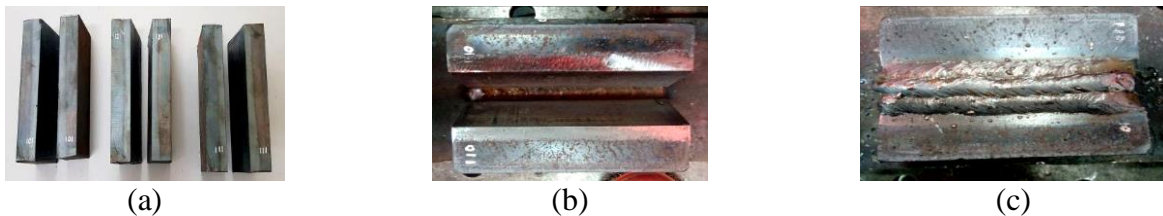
Butt welding of thick steel plate with narrow clearance: (a) Workpieces with small chamfer ($\alpha = 15^\circ$); (b) Fixing workpieces with gap spacing equal to the torch tip diameter; (c) Finished welding sample.
